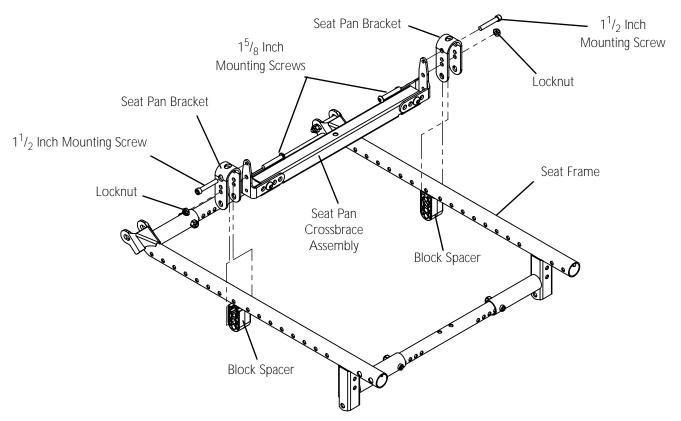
Removing/Installing the Seat Pan Crossbrace Assembly
